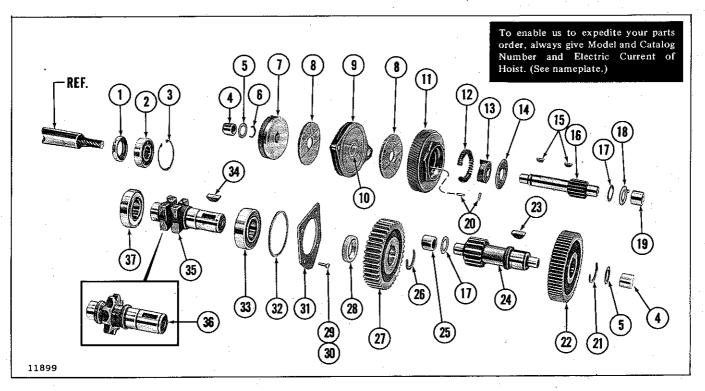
GEARING AND LOAD BRAKE PARTS - (1, 2 & 3 Ton Hoists)
